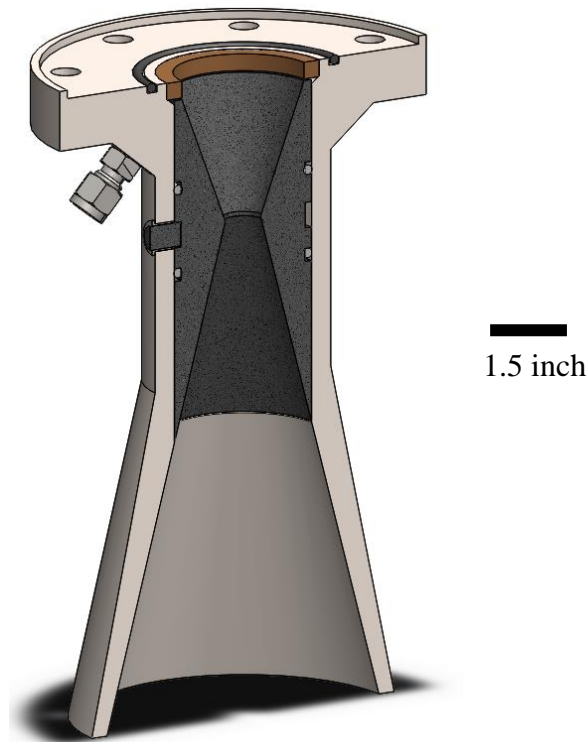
CAD cutaway view showing the major design elements associated with the overall nozzle assembly.
